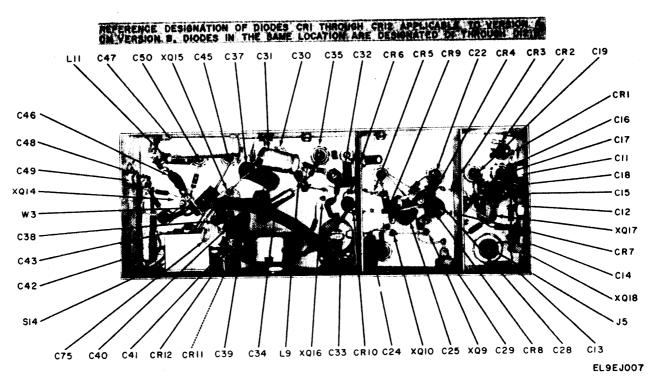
Pulse Generator Assembly, Bottom View, Nonresistive Components.
